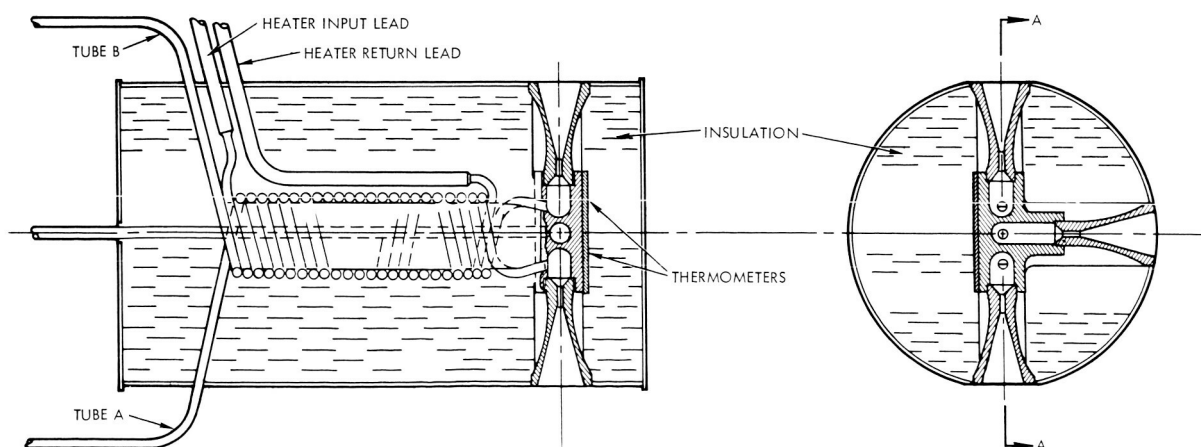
Sectional Schematic Illustration, Tri-Nozzle Thruster Assembly
